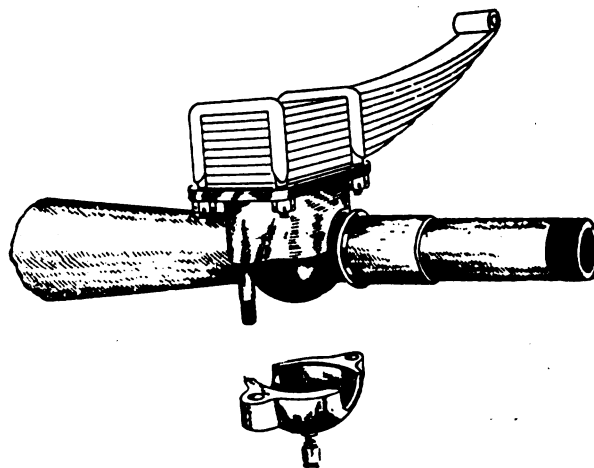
Details of Spherical Bearing on the Lorraine-Dietrich Live Axle Cars, by which the Spring-carrying plate is attached to the axle.
